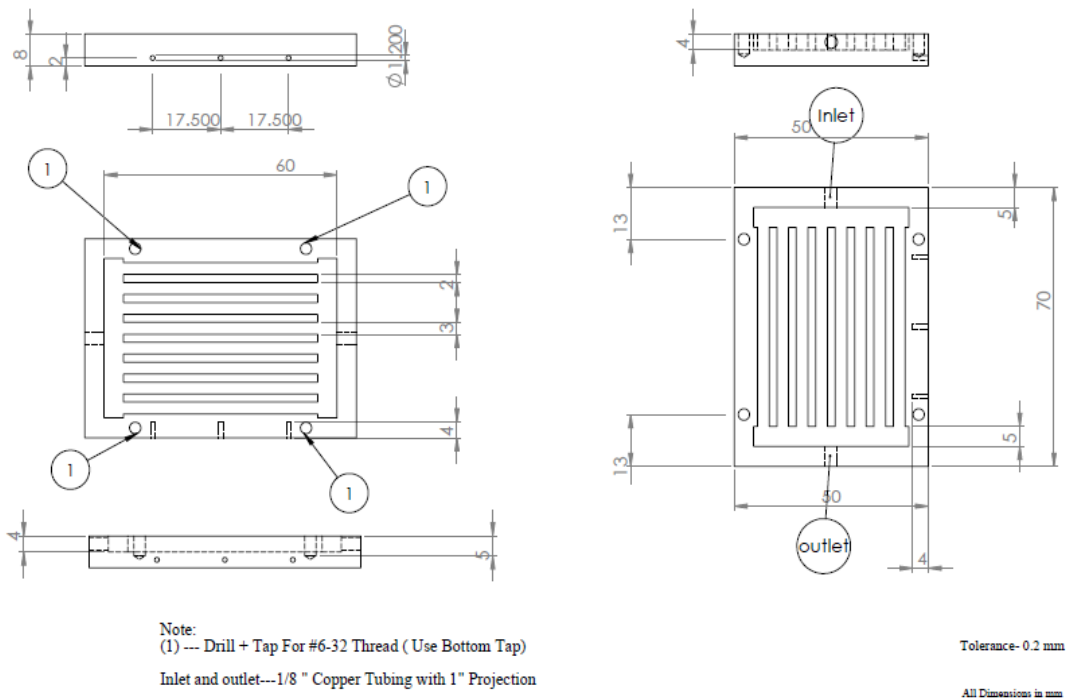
Two Dimensional Draft of 3mm minichannel heat sink
